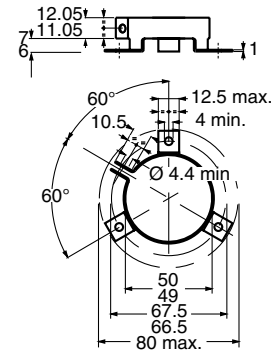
Dimensional outline of clamp for case $\varnothing D = 50 \text{ mm}$
